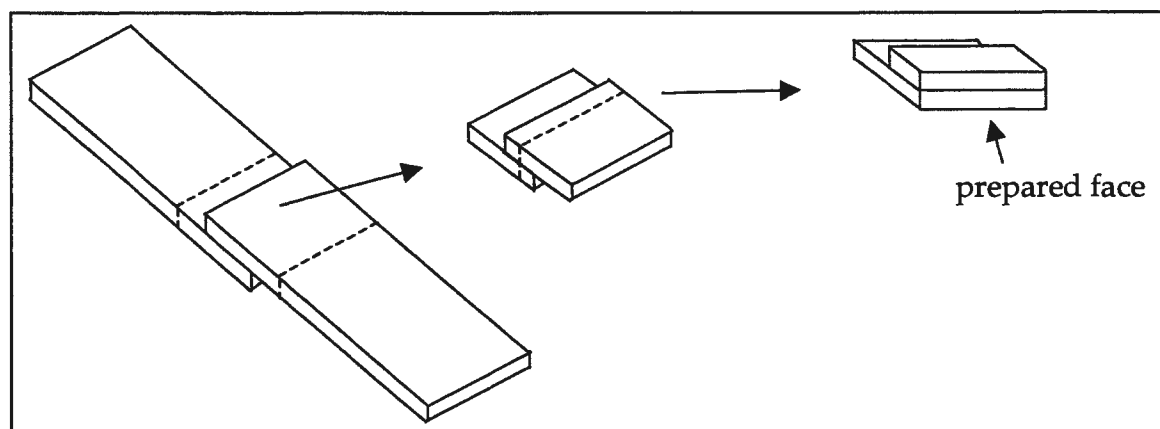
Schematic illustrating metallographic sectioning for the plug, spot, and seam weld specimens.
